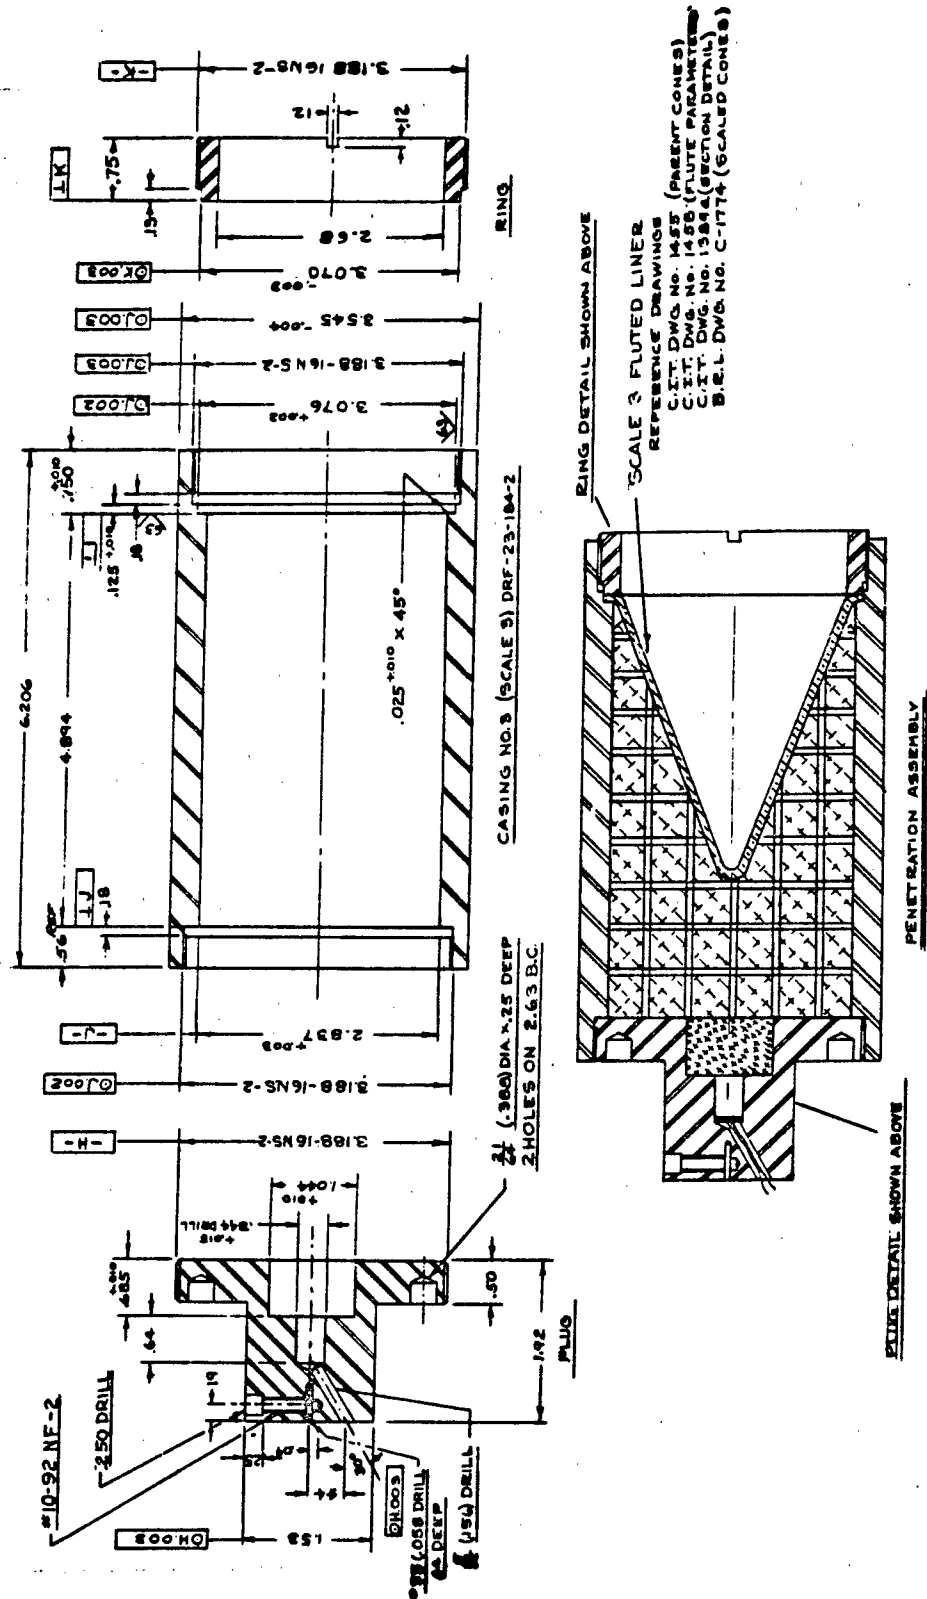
Test Body Details and Penetration Assembly, Scale 3.
